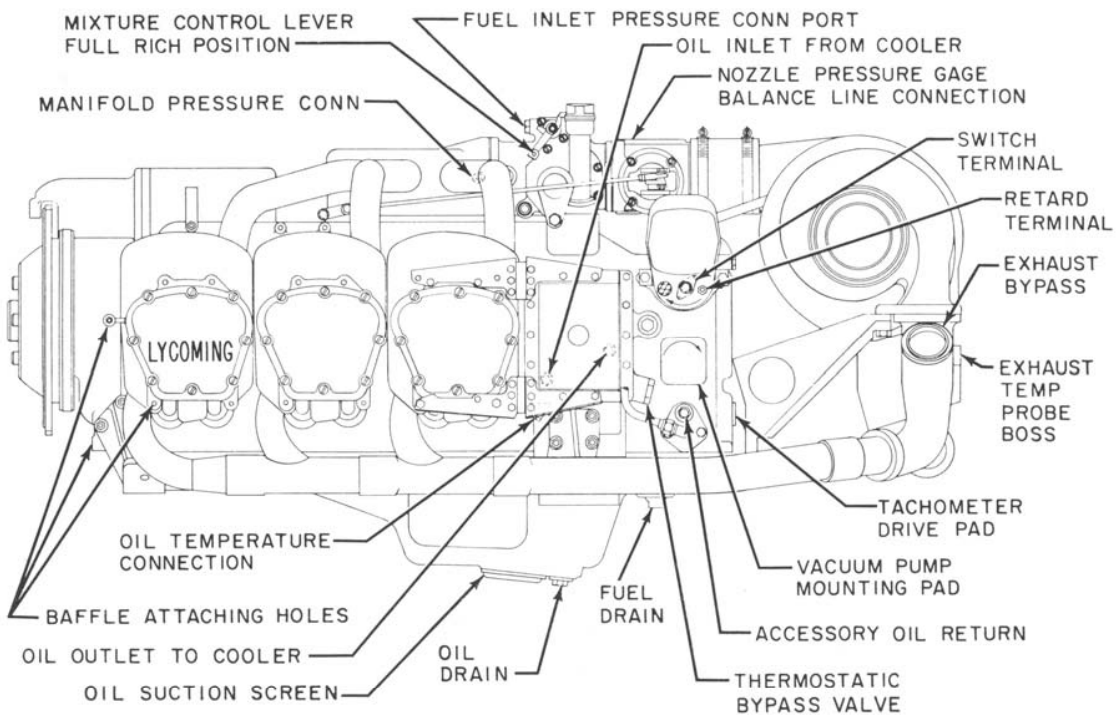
Installation Drawing – Left Side View – TIO-541-E Series
